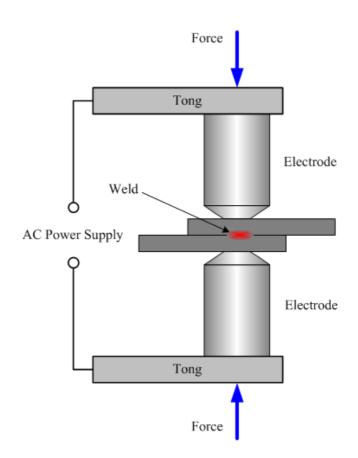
Diagram of resistance spot welding (method 21)
